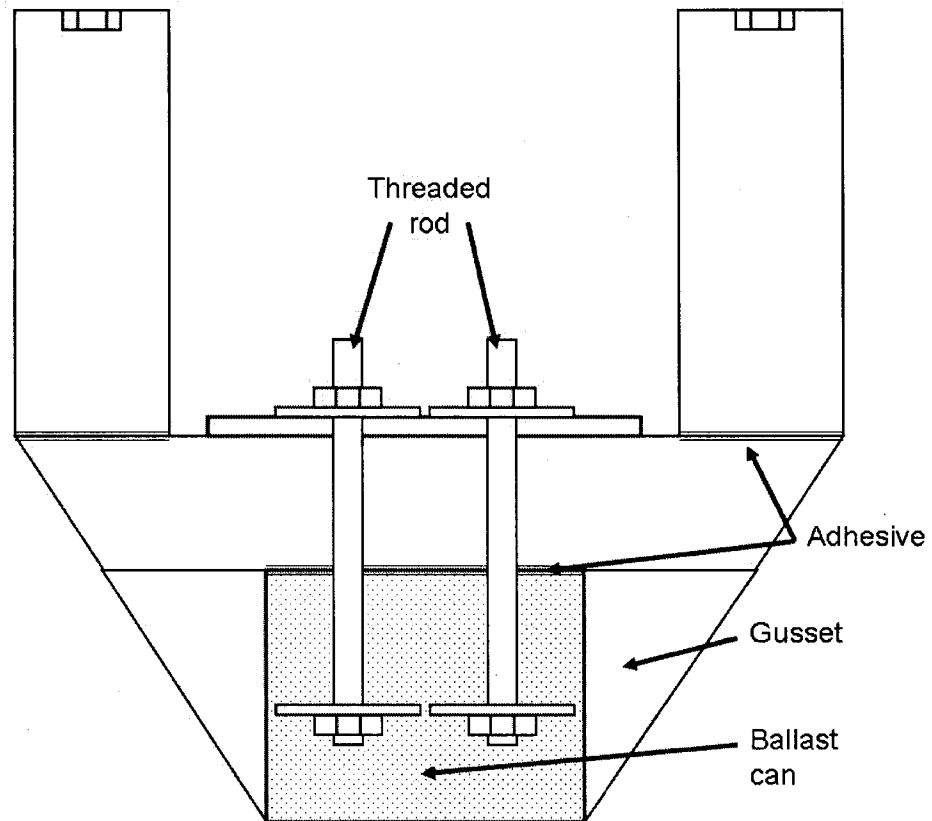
Cross-section sketch showing the construction details for the hull and ballast can assembly with gussets.
